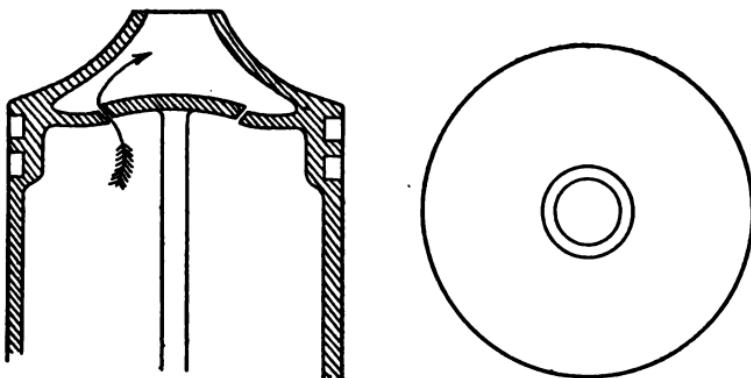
Section and top view of a valved piston for a 2-cycle engine, showing device for throwing the incoming gas to the top of the cylinder space.
